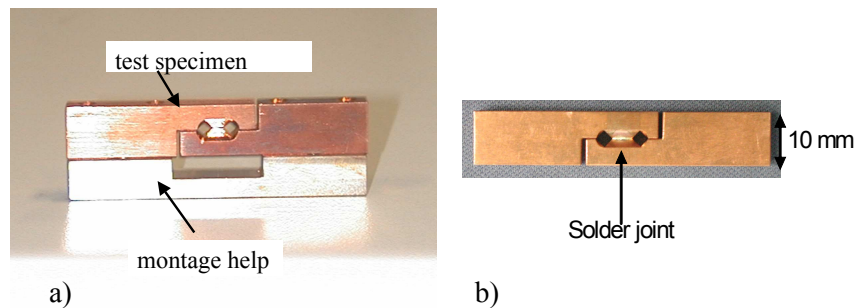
a) the montage help with the 2 copper pieces b) the test specimen soldered
